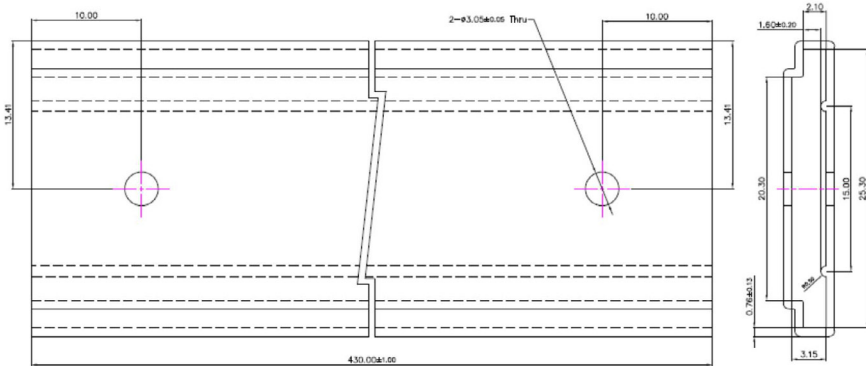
Tube dimensions for L2C5-xx001208E1500.
